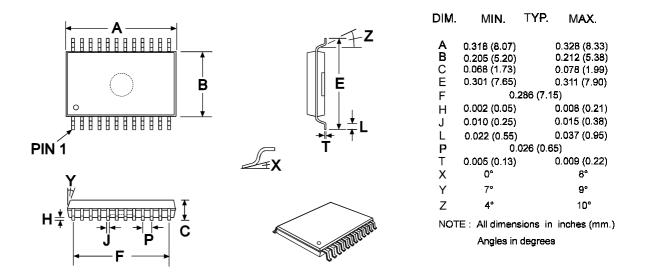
D5 Mechanical Outline: Order as part no. FX839D5
